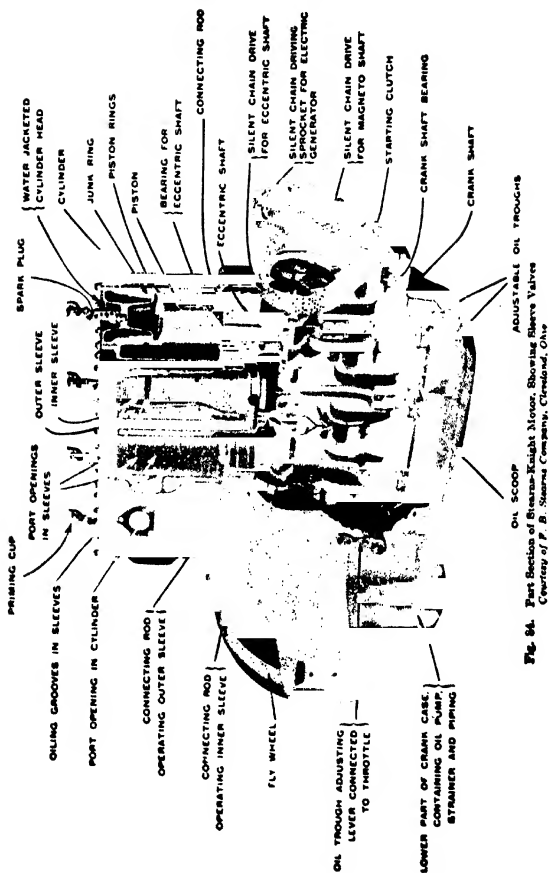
Part Section of Brearley-Knight Motor, Showing Sleeve Valve
